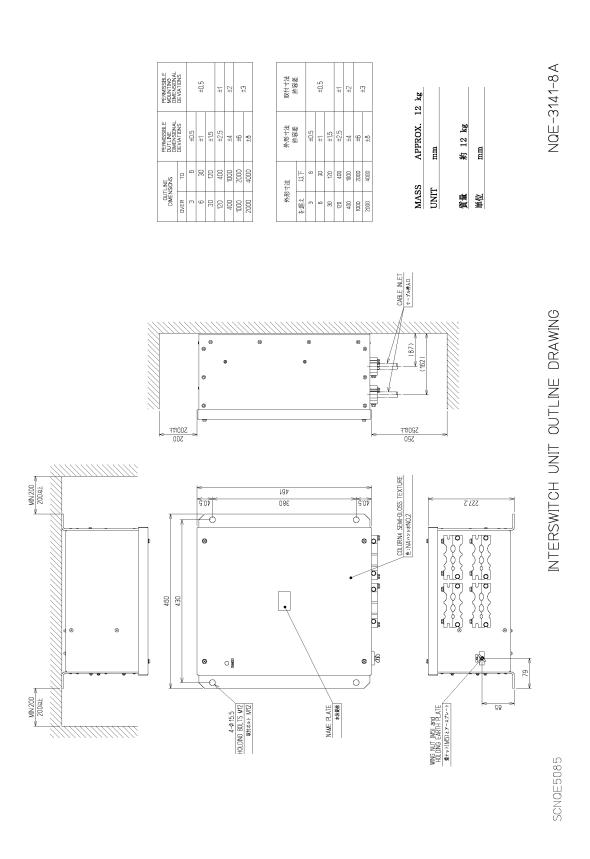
Outline Drawing of Interswitch Unit, Type NQE-3141-8A (Option)
